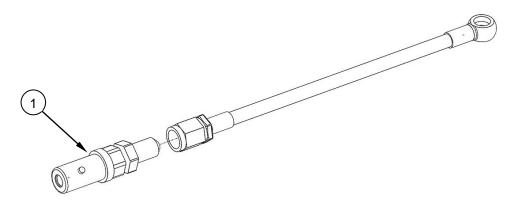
Master Cylinder Plumbing Assembly – Hook 1 & 2 P/N 232-632-00
